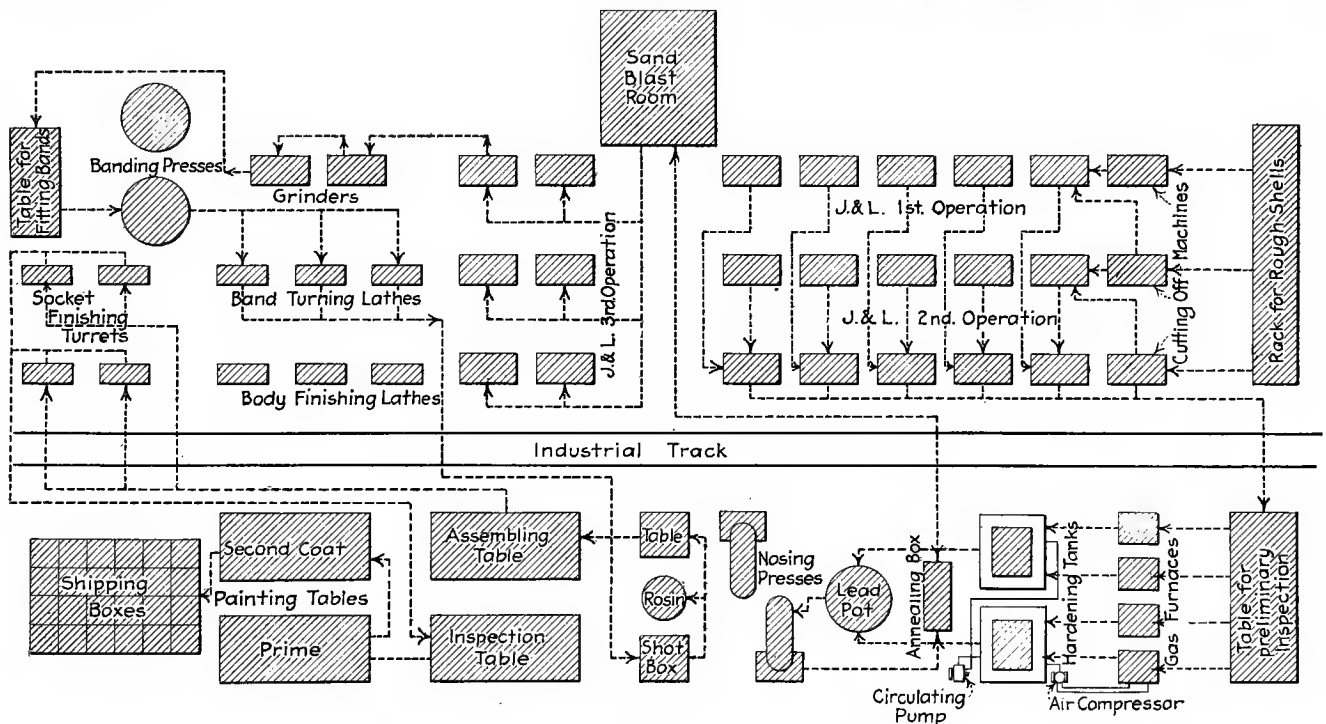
GENERAL ARRANGEMENT OF DOMINION BRIDGE CO.'S PLANT
